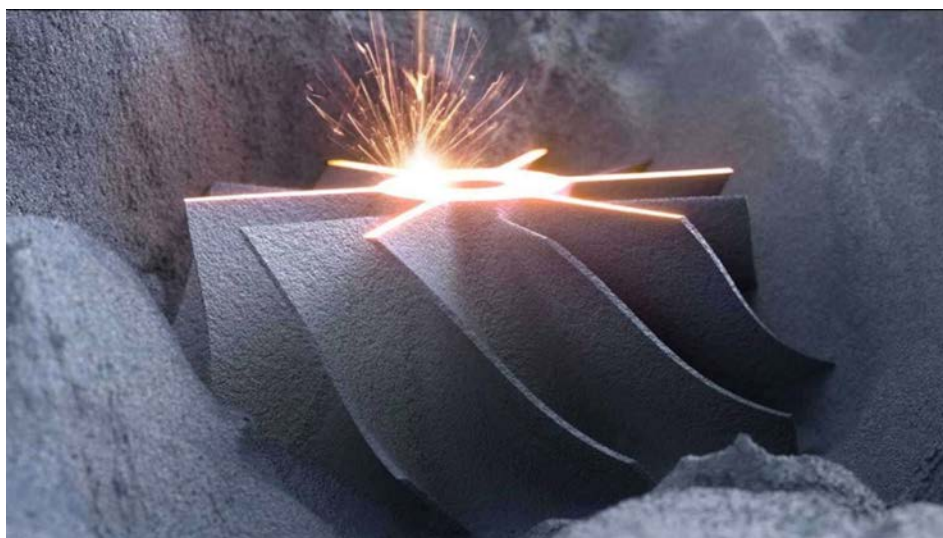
Manufacturing of a turbine wheel with DMLS
